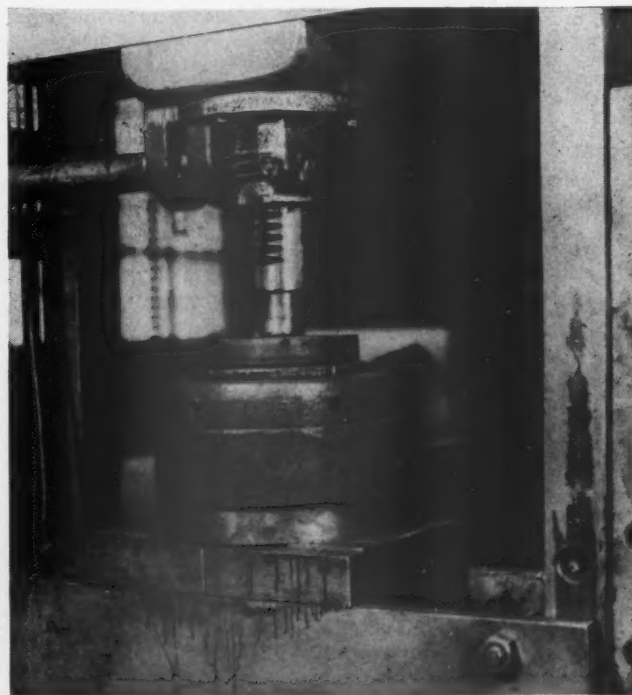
A set of springs is being pushed of a wheel rim into the jig at the bottom
